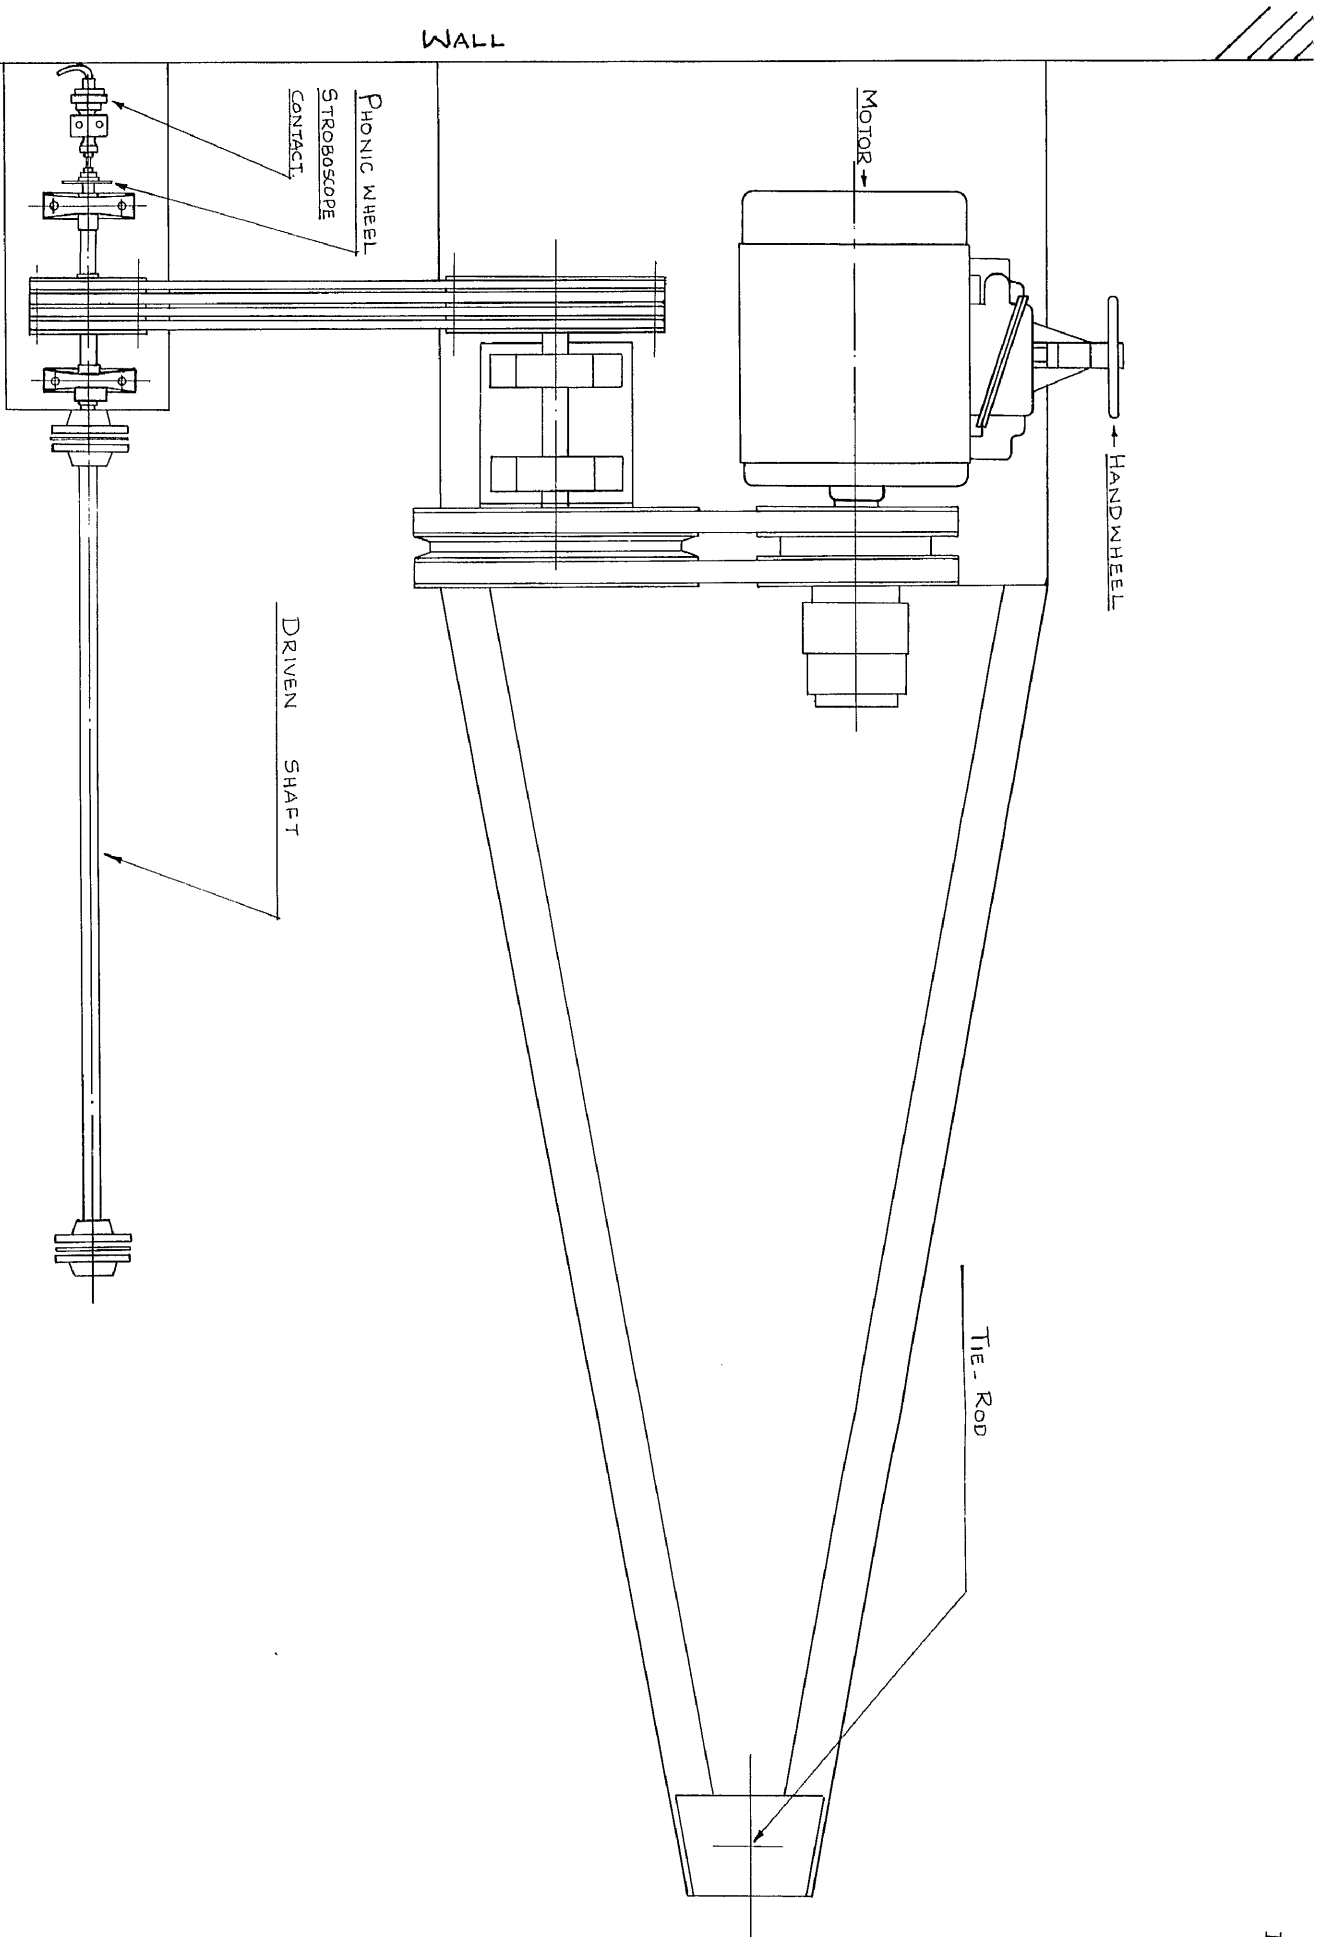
MOTOR AND PULLEY ASSEMBLY.
